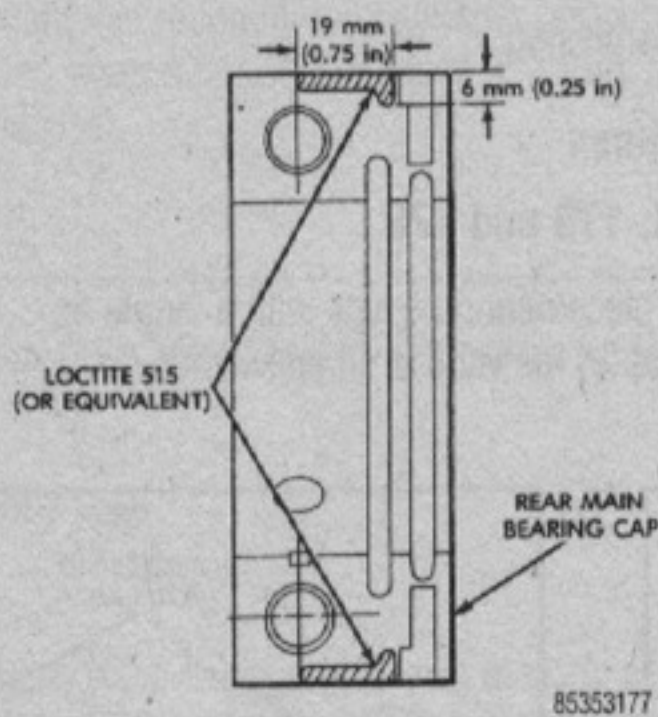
Crankshaft oil seal location—2.5L, 4.0L and 4.2L engines
